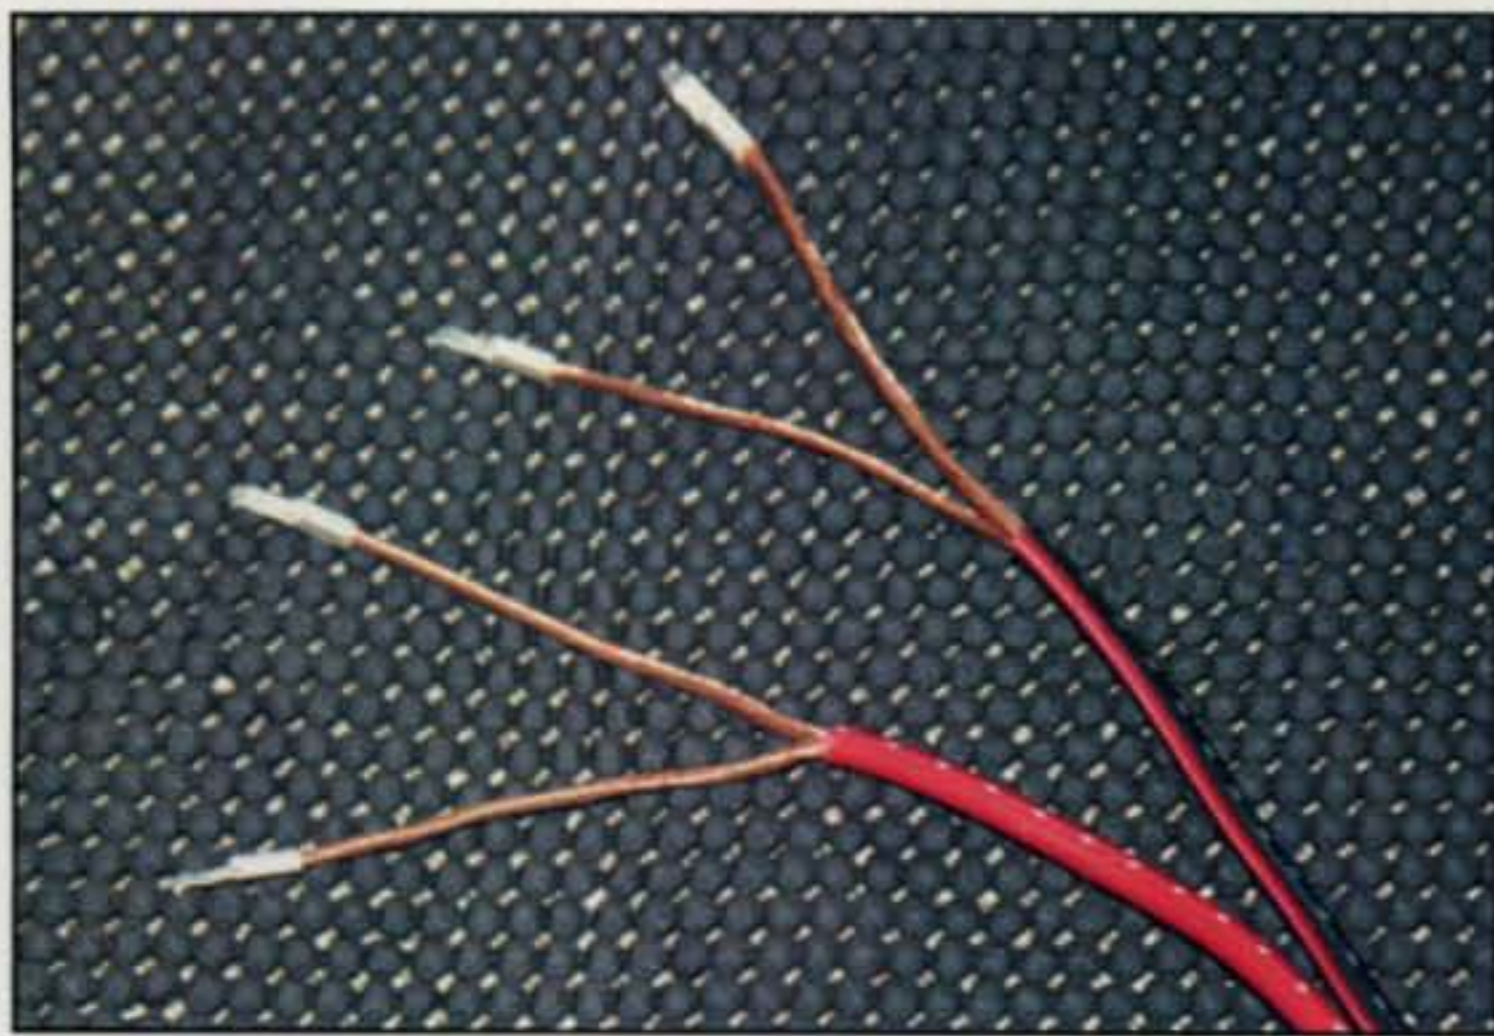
Strip about six inches of insulation from the thick wires, and make each wire into two smaller wires by separating the strands.
